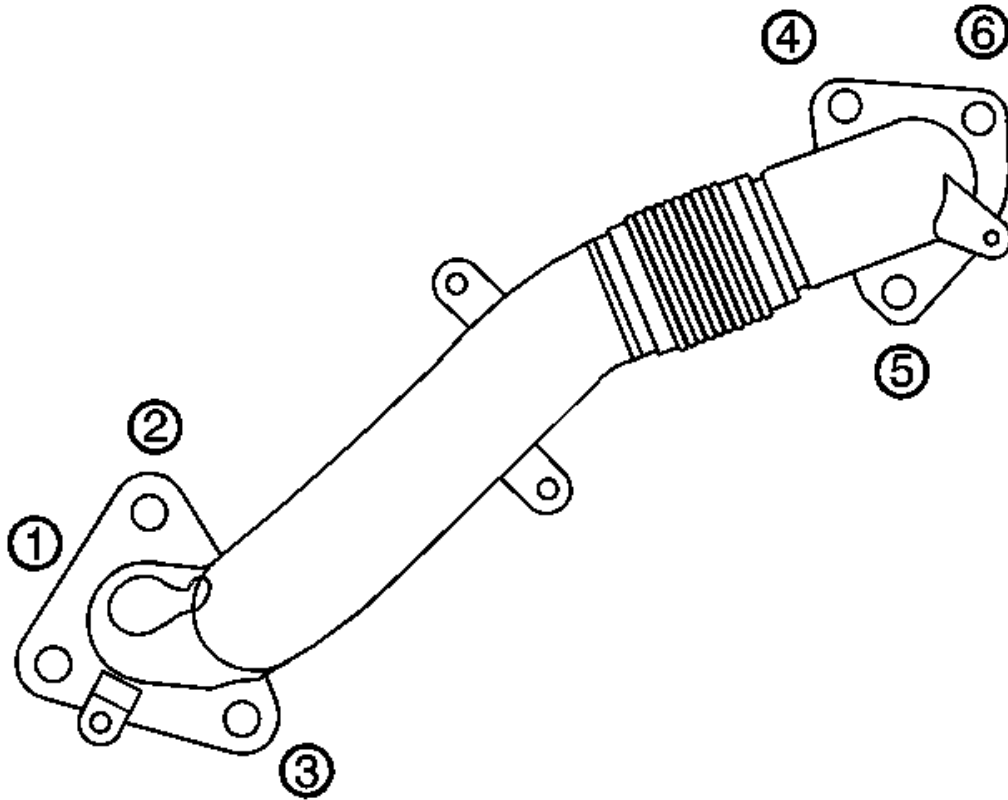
Left Exhaust Pipe Bolts Removal Sequence
